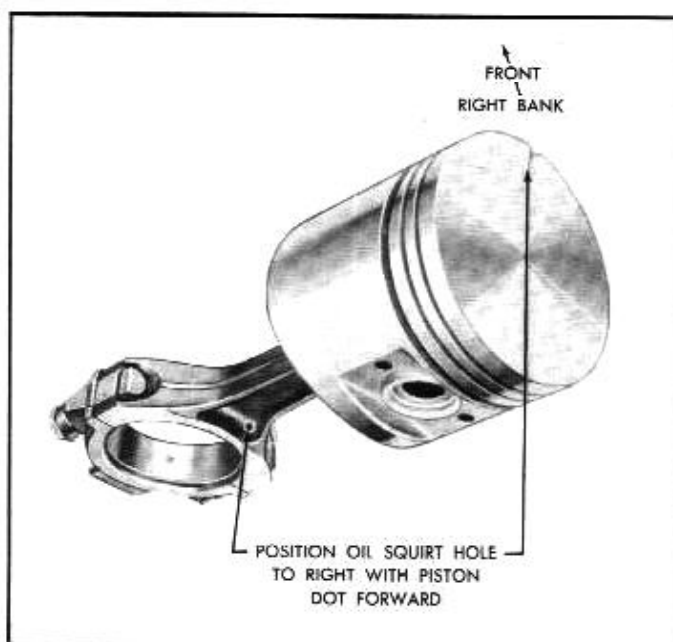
A-113—Position of Piston Assembly and Connecting Rod—Right Bank
